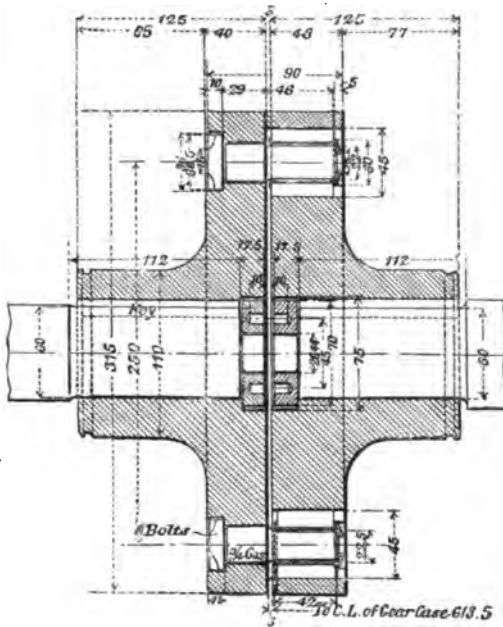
Coupling for Power-shafts of 225 B.H.P. De Laval Turbine.
